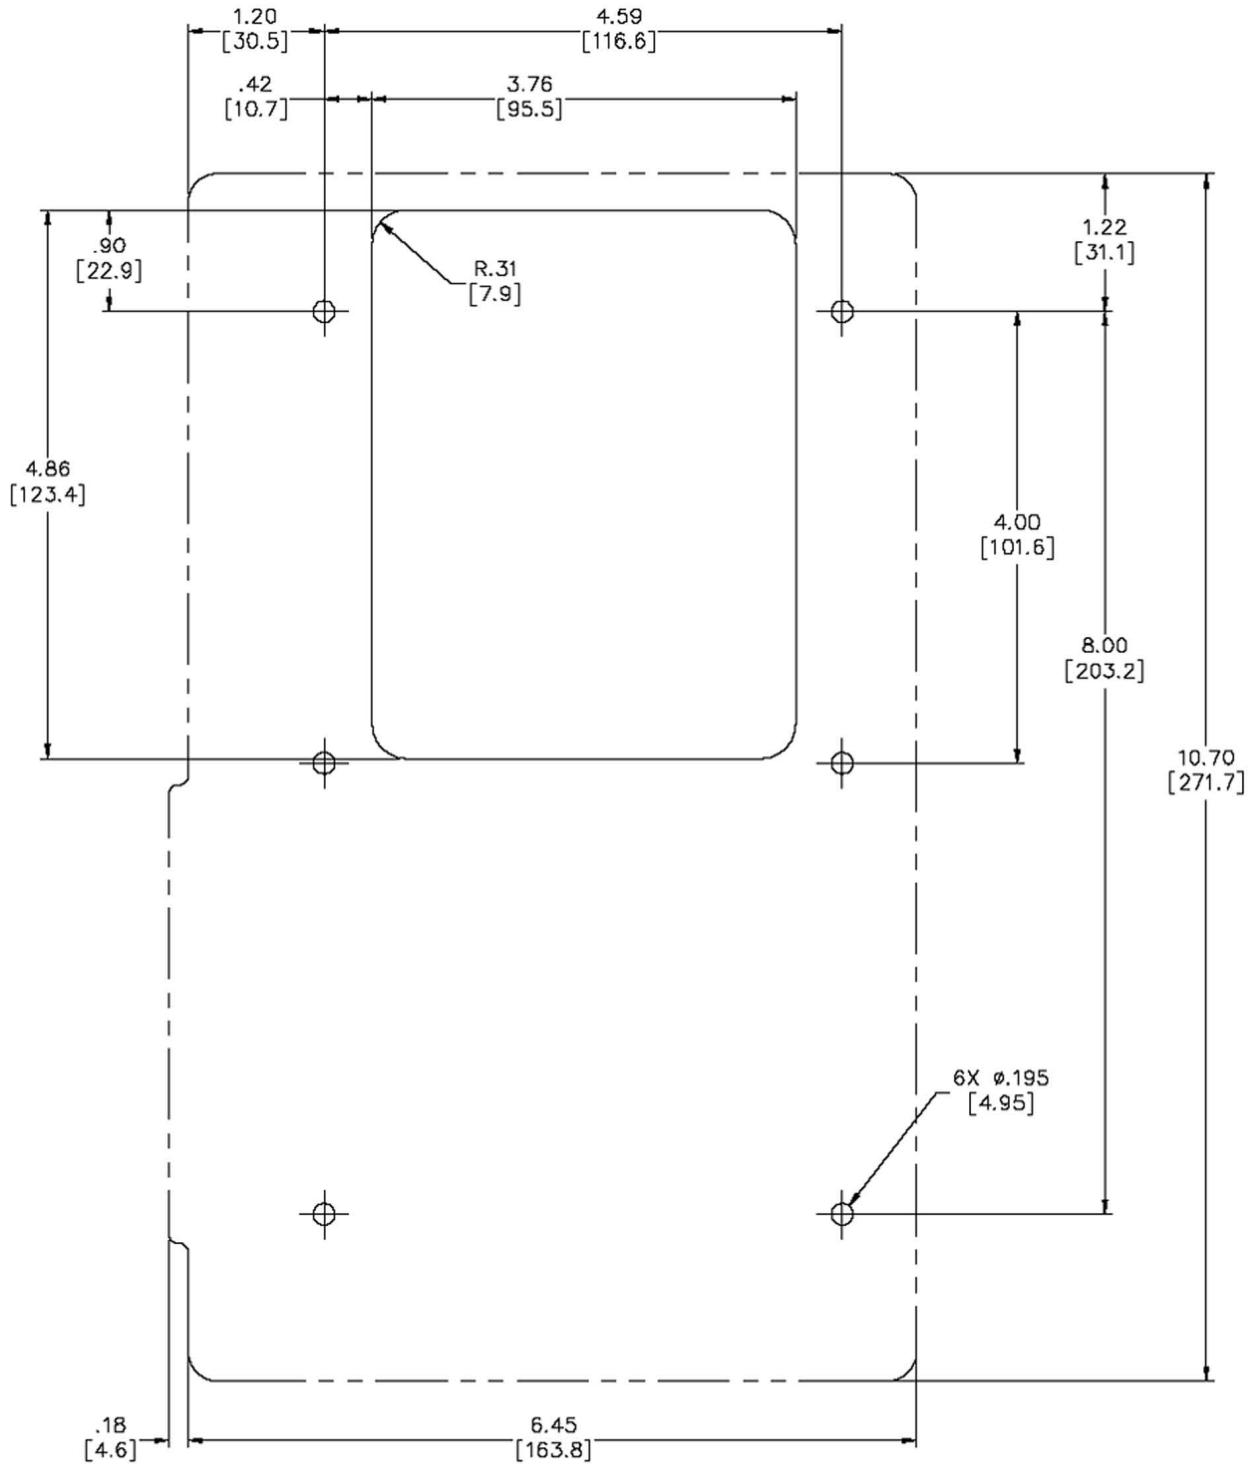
Cutout and Drilling Dimensions. Valid for 2400 & 2500 versions.
